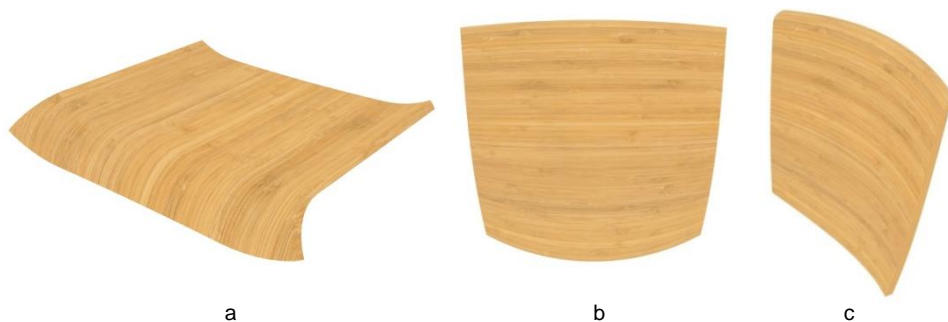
(a) Perspective view design of the seat component of laminated bamboo chair, Design of the back rest of the laminated bamboo chair. (b) Front view, (c) Perspective view
